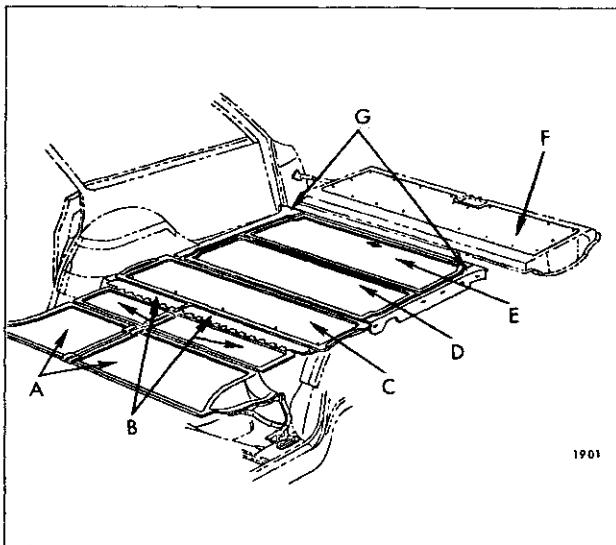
Folding Seats and Floor Panels - Chevrolet "B-45" Styles
